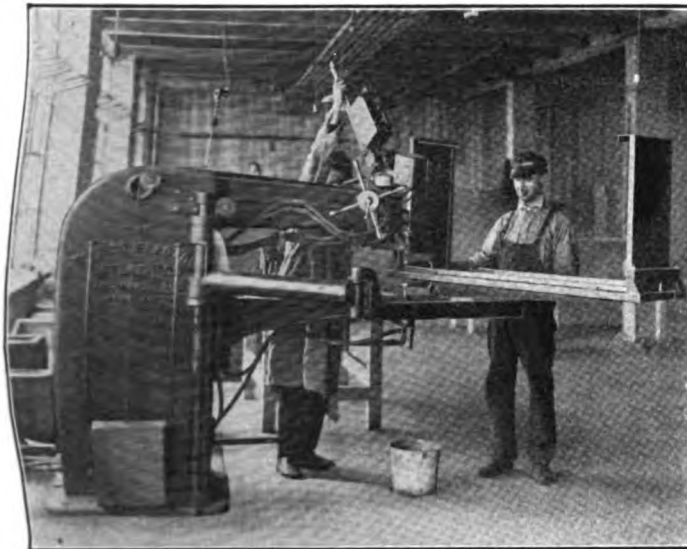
SPOT WELDING THE SECTIONS
